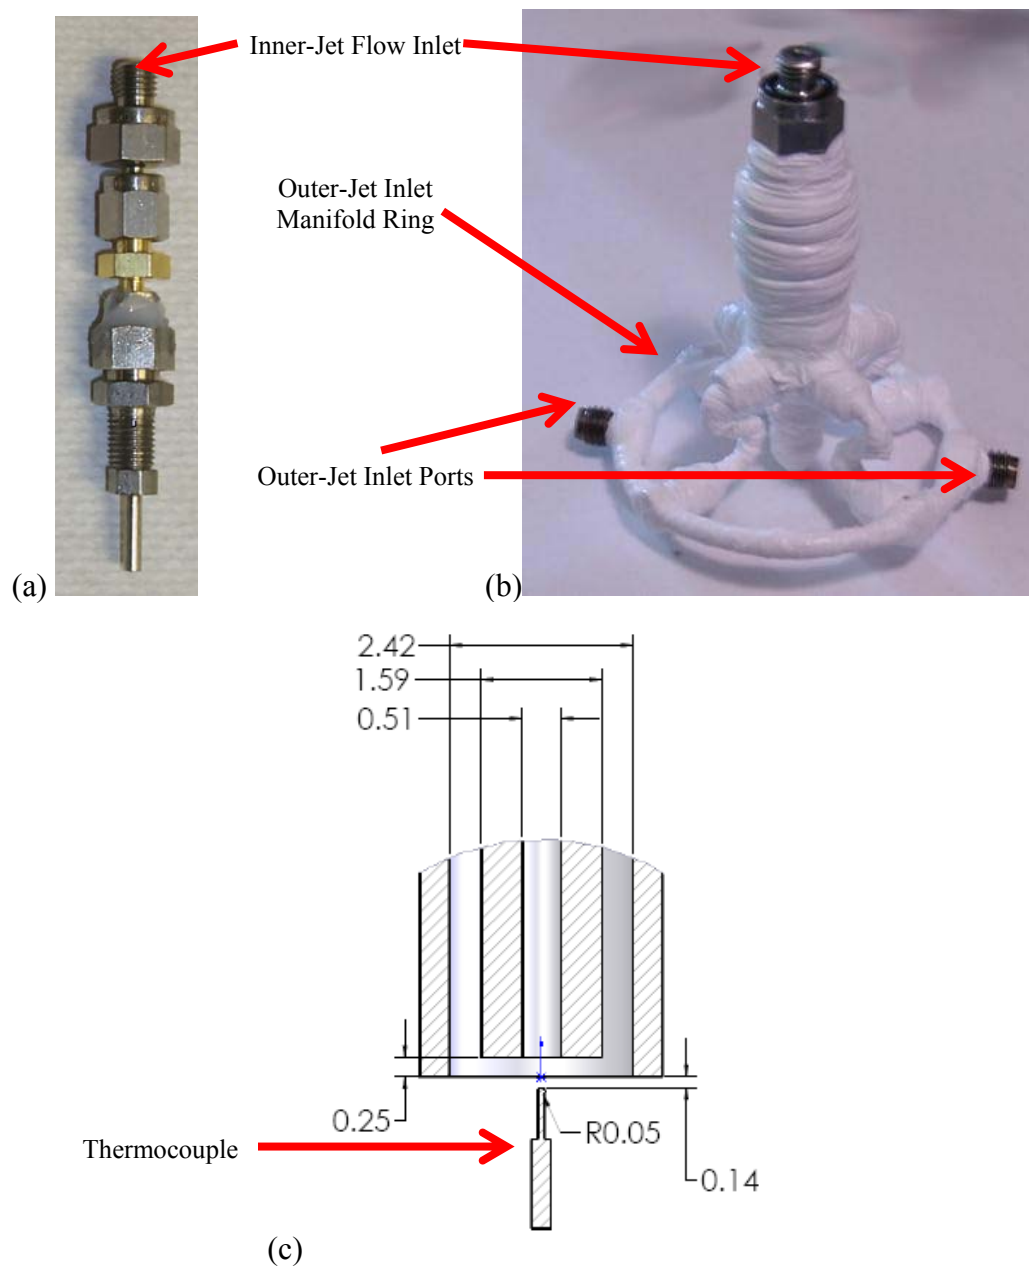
Photograph of shear-coaxial injector (a) without gas manifold and insulation, (b) with gas manifold and PTFE insulation. Scale cross-section drawing (c) of injector exit-plane area also indicates relative size and position of thermocouple used for temperature measurement. Dimensions in mm.
